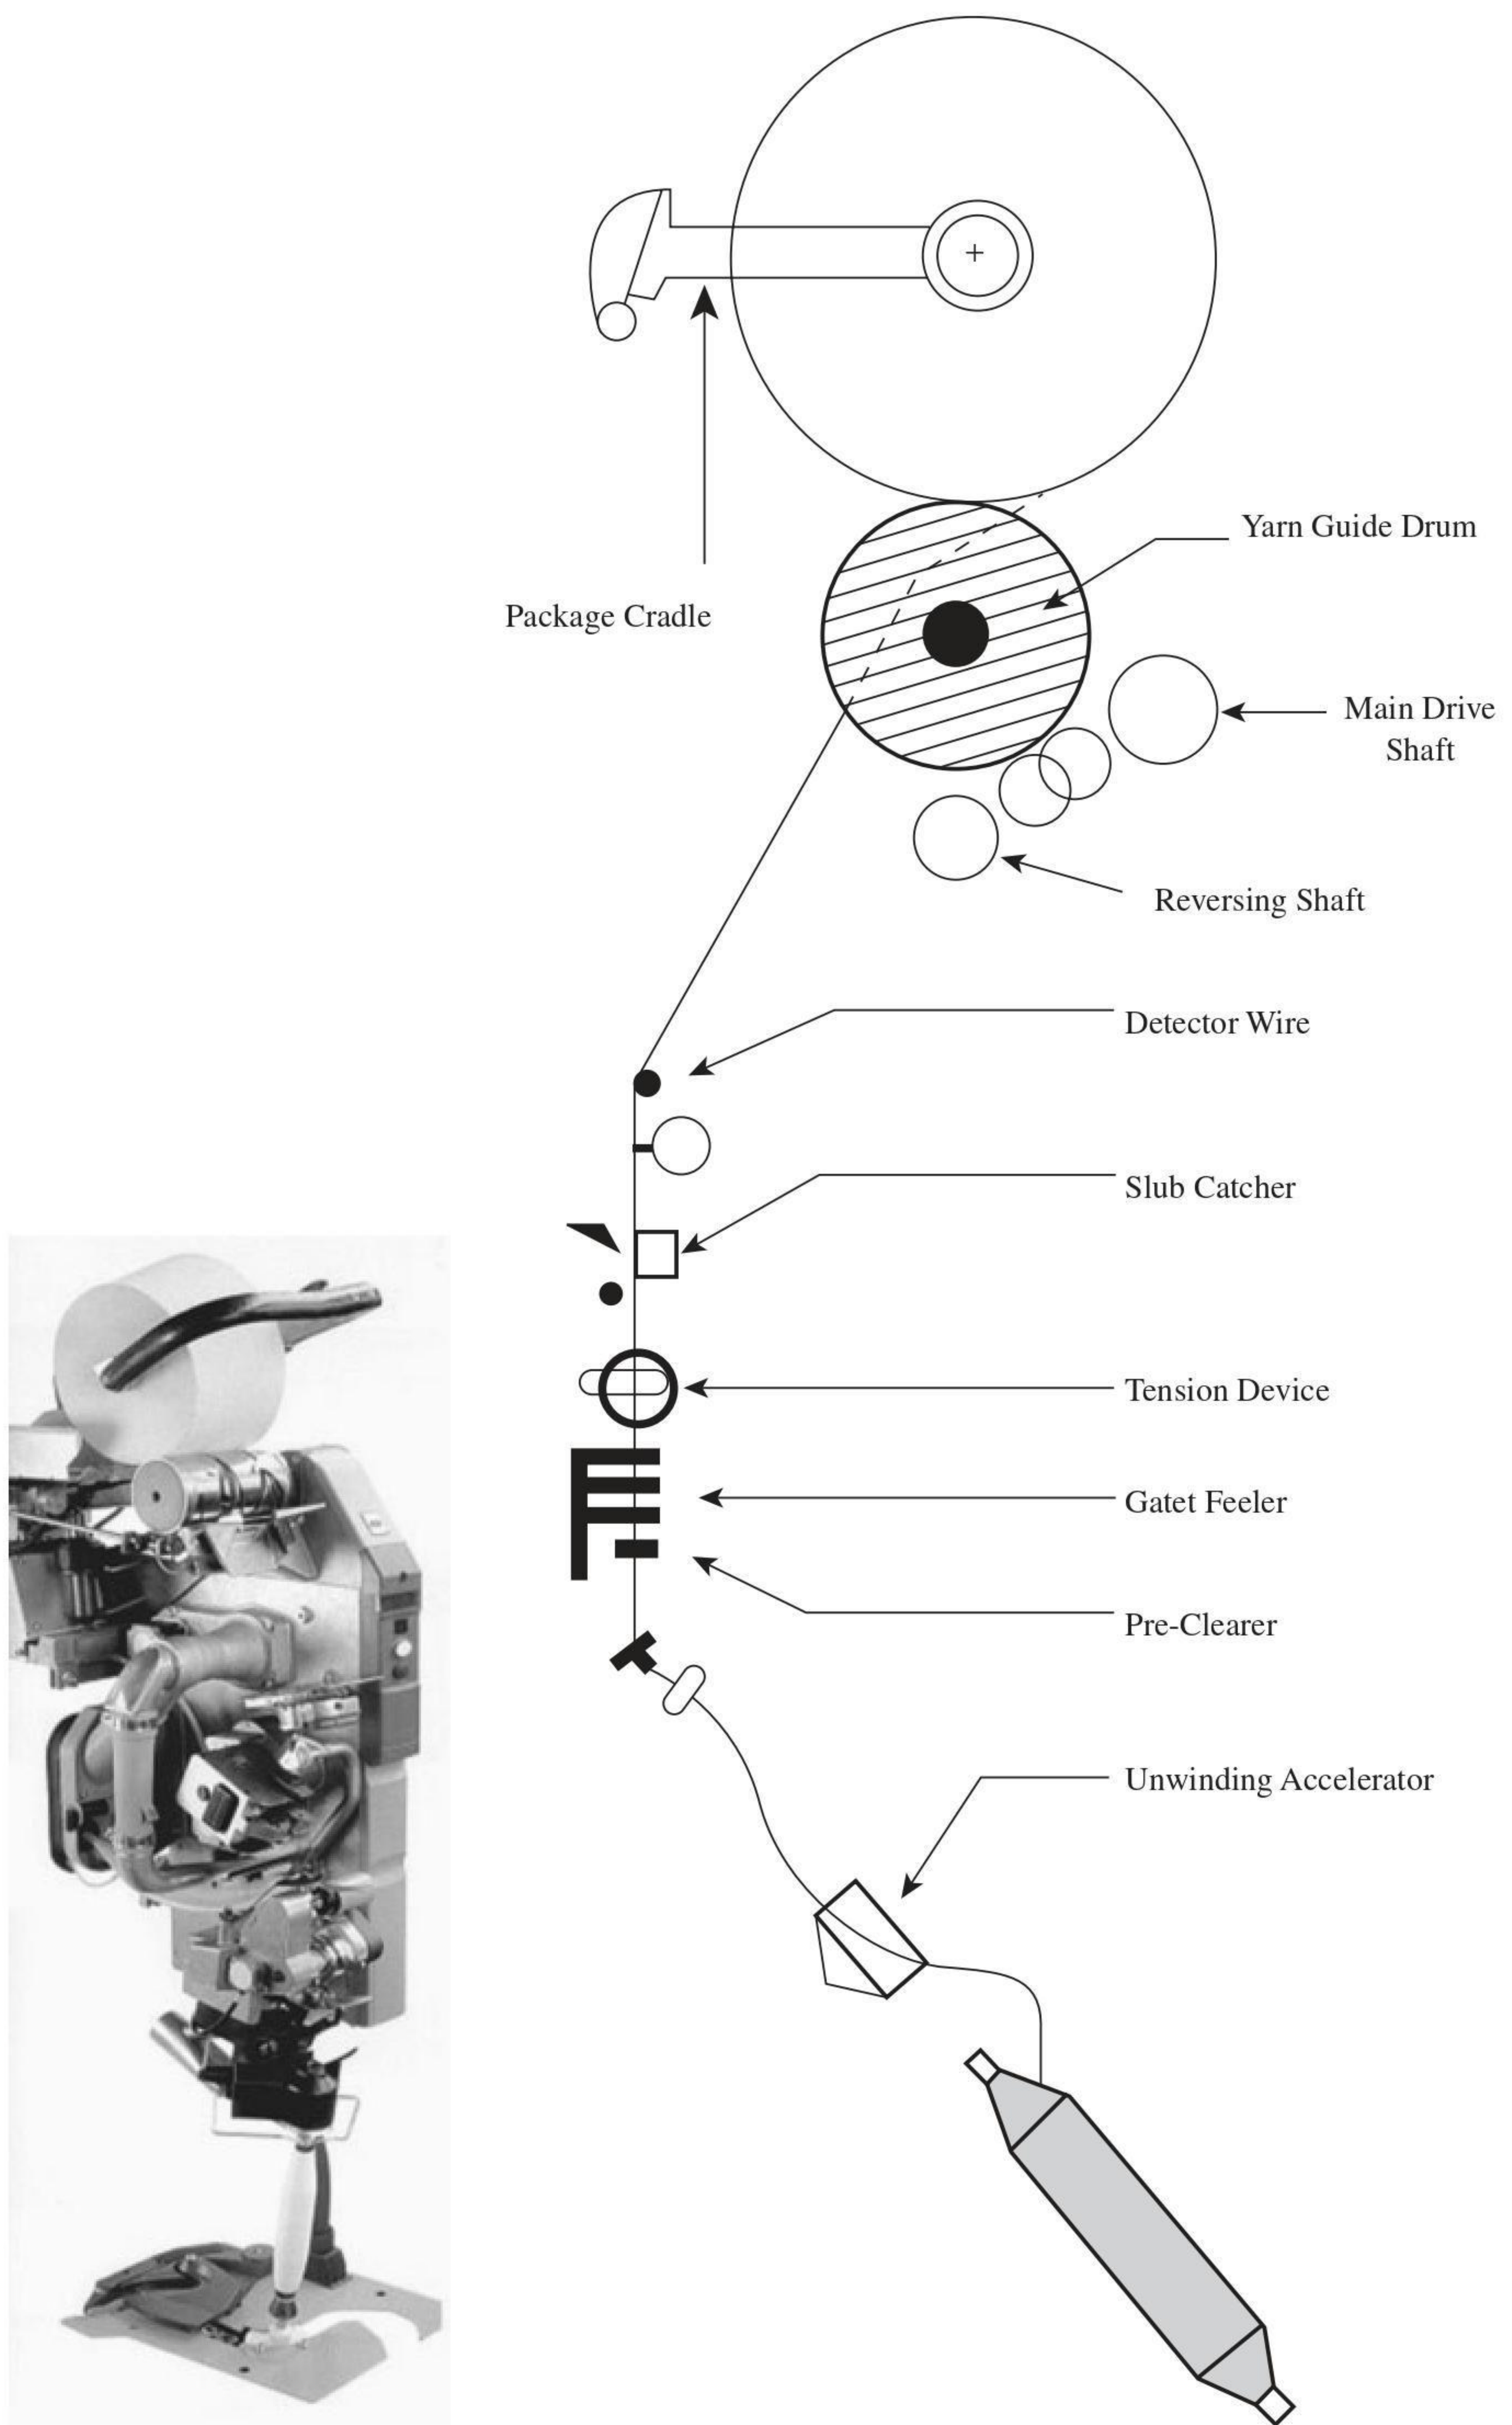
Typical arrangement of winding unit. (Courtesy of W. Schlafhorst AG & Co.)
